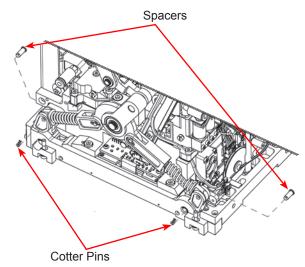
Fluidics Module Latch Mechanism Linkage Spacers
